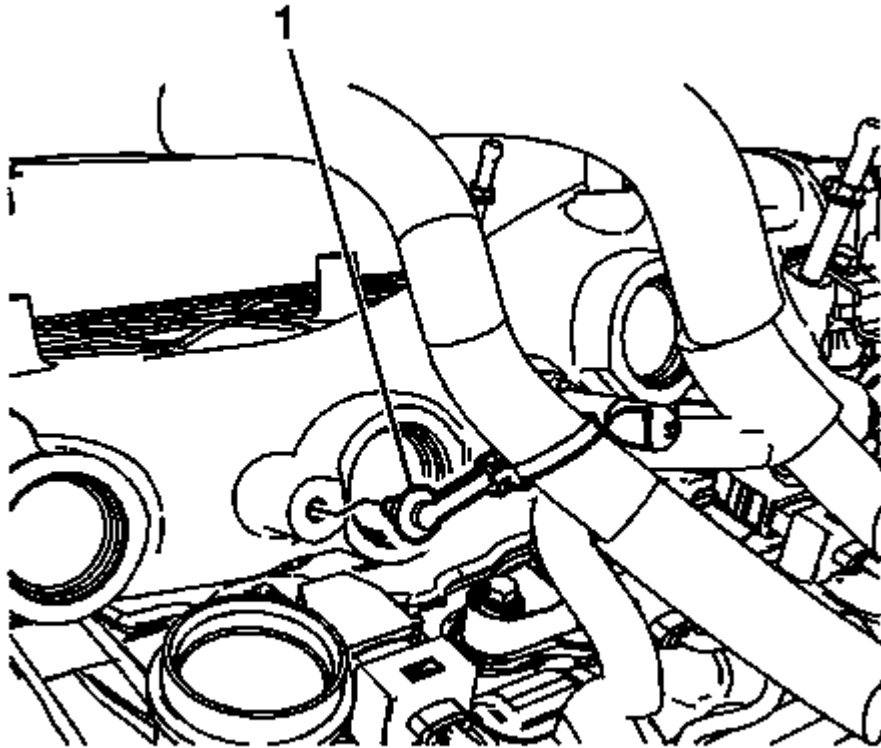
Identifying Intake Manifold Wiring Harness Retaining Clip
